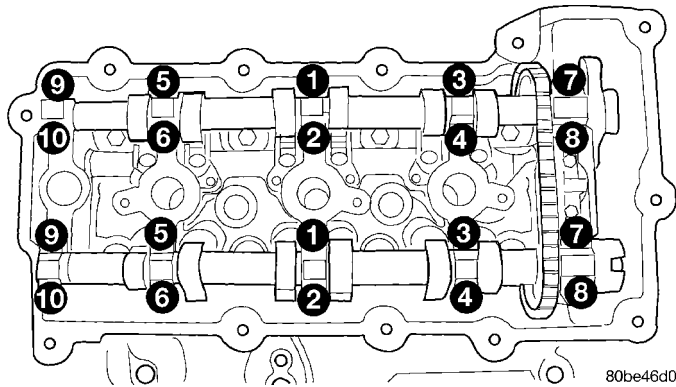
Camshaft Bearing Cap Tightening Sequence
